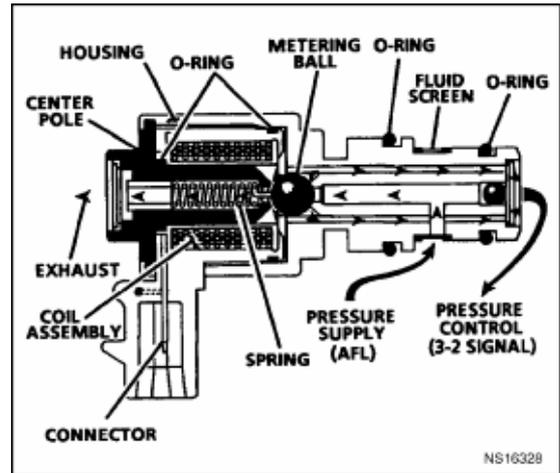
C2-1-75 3-2 Control Solenoid Cutaway View
